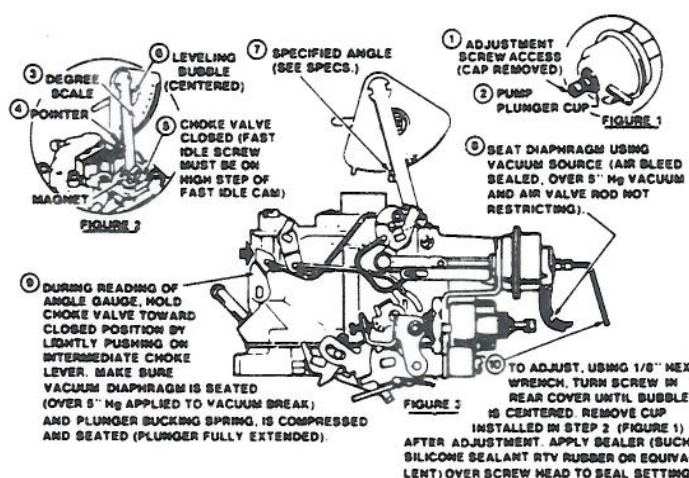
Primary vacuum break adjustment. 1982 E2SE carburetor
